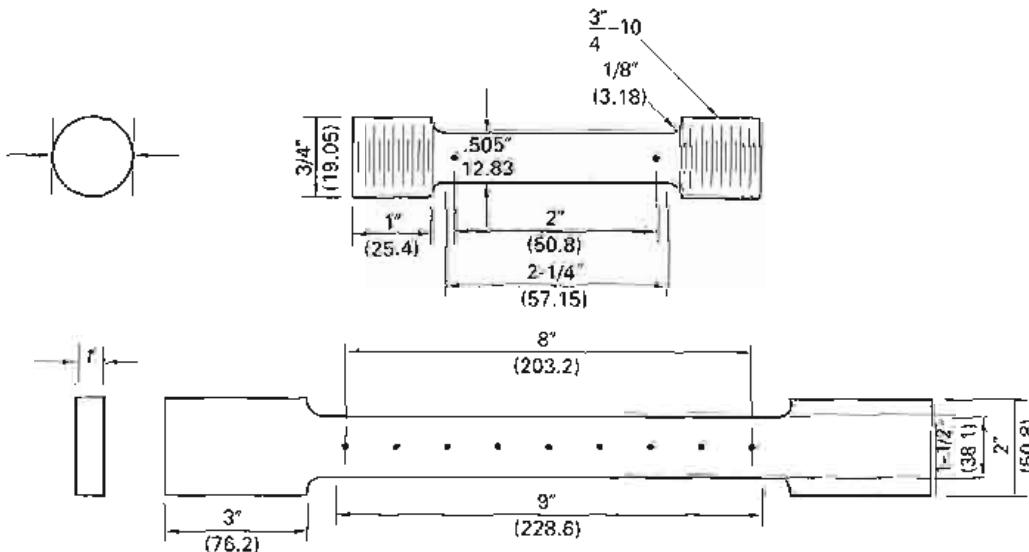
Two common types of standard tensile test specimens: (a) round; (b) flat. Dimensions are in inches, with millimeters in parentheses.
